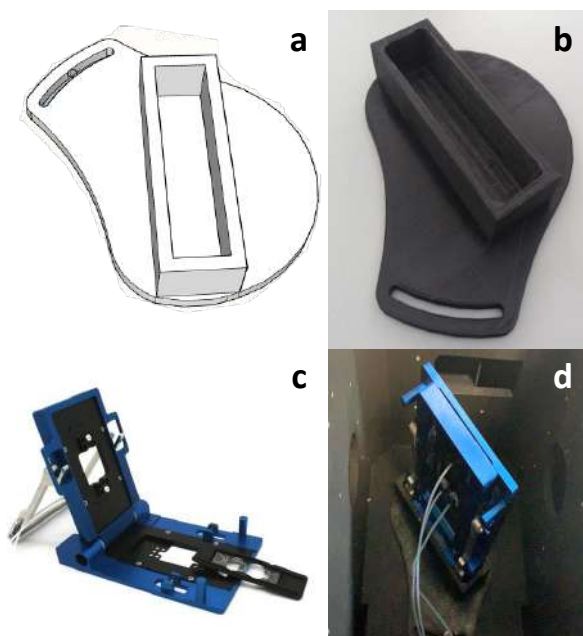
Three-dimensional printer alignment device: a 3D-CAD prototype, b 3D printer alignment device performed using biodegradable polylactic acid (PLA-850), c chip-holder and microchip device, and d integrated 3D printer alignment device into the sample chamber at the spectrofluorimeter system
